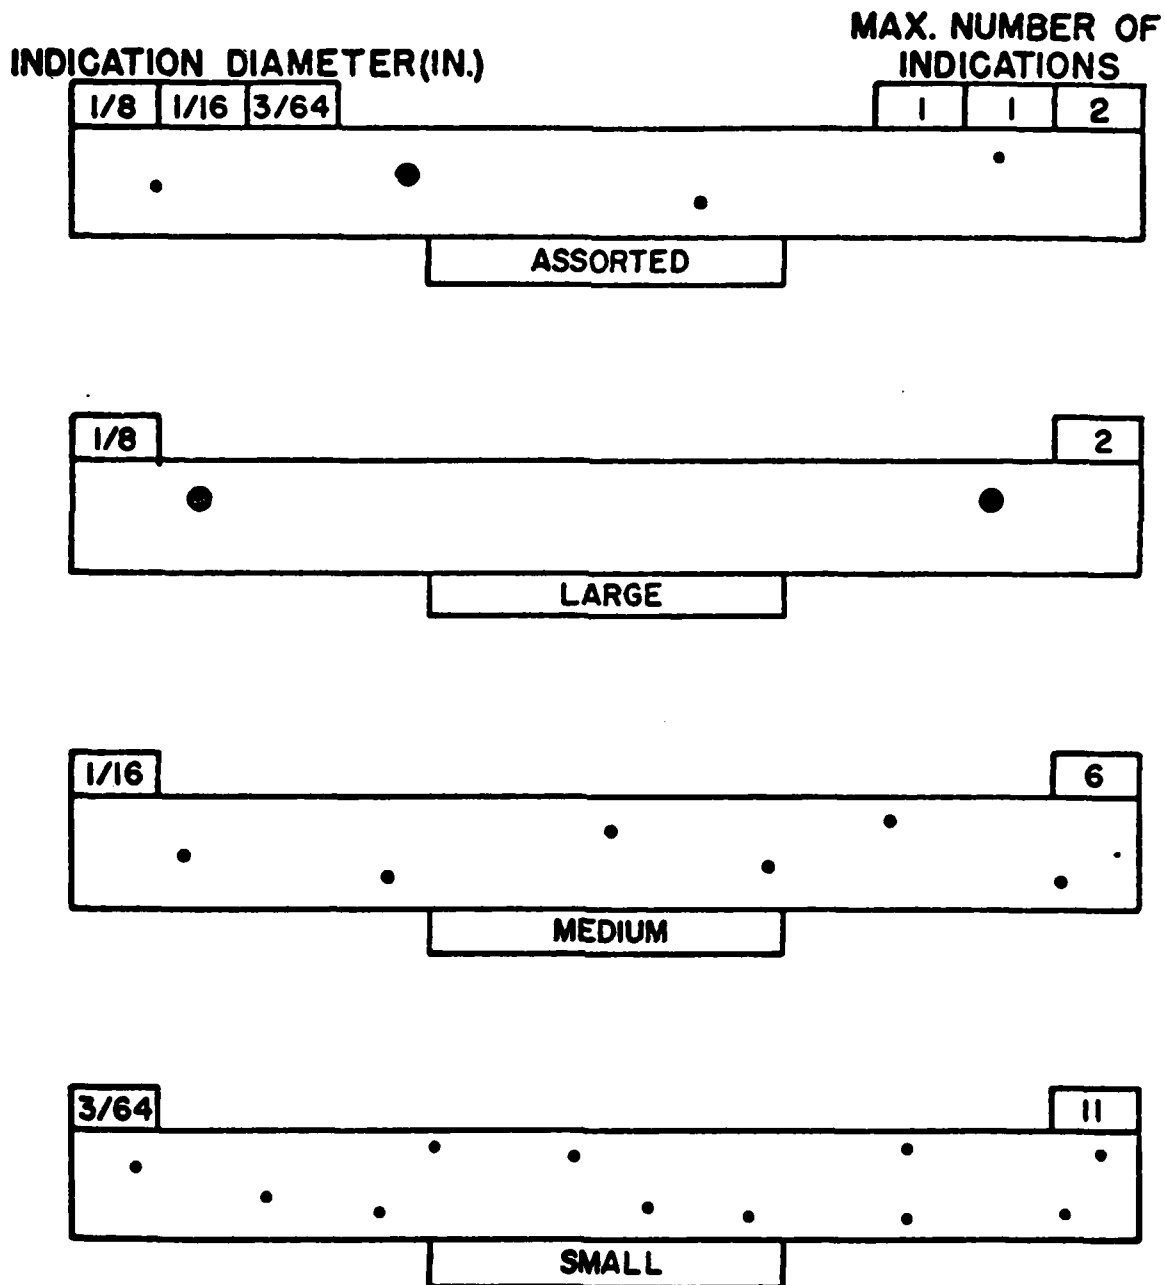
Class 2 Weld Surface Inspection Standards for Scattered Rounded or Non-Linear Indications (Sheet 4 of 6).
